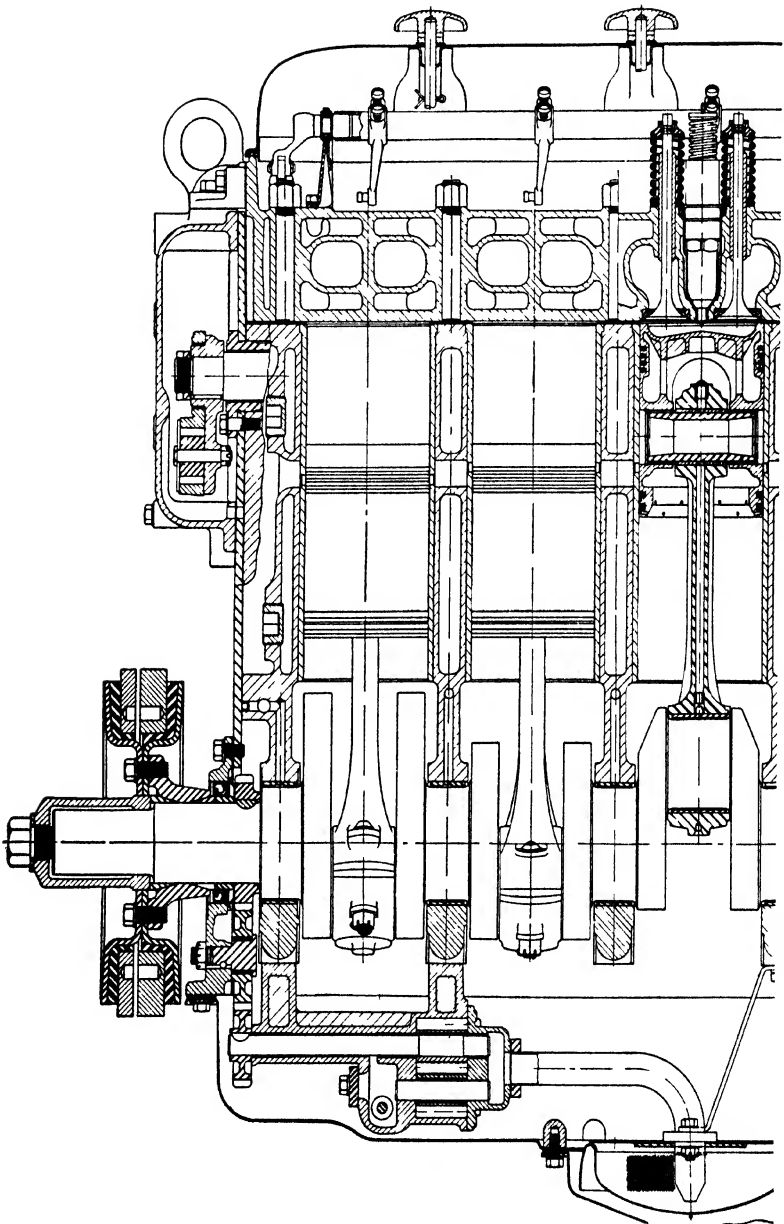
A.—LONGITUDINAL SECTION OF GENERAL MOTORS TYPE 6-71 ENGINE,
